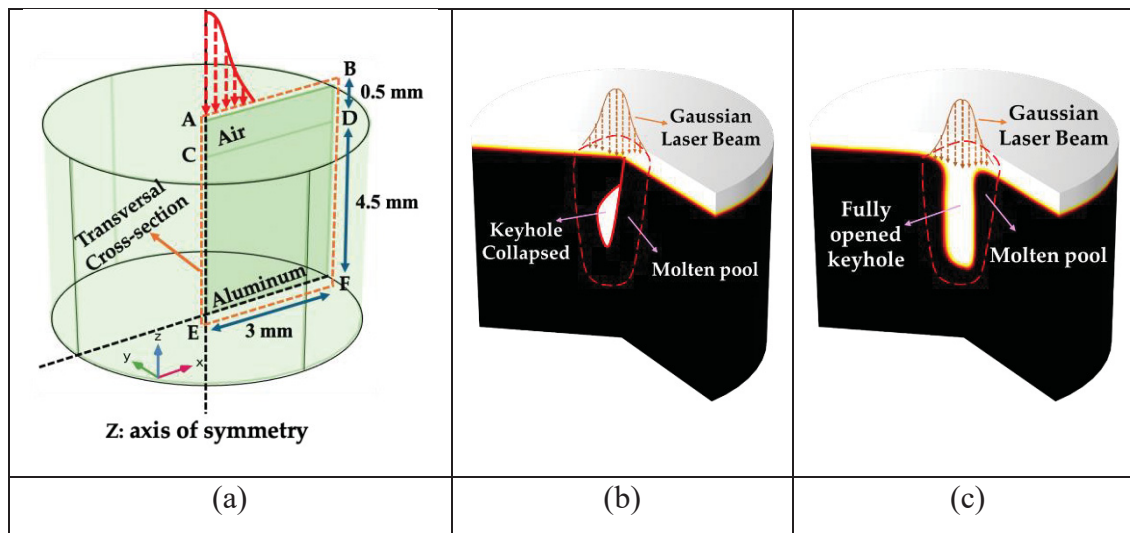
Schematic 3D representation of (a) the 2D axisymmetric laser welding setup with Gaussian beam profile, (b) laser-based welding process with keyhole collapse (closed keyhole) induced by instabilities, and (c) laser-based welding process with keyhole stability (open keyhole)
